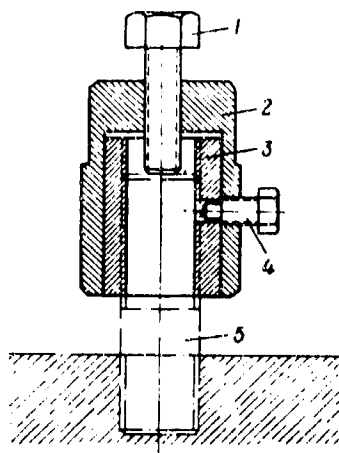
Socket Wrench with Removable Socket: 1 - check-bolt; 2 - frame; 3 - removable socket; 4 - set (binder) bolt; and 5 - pin.
